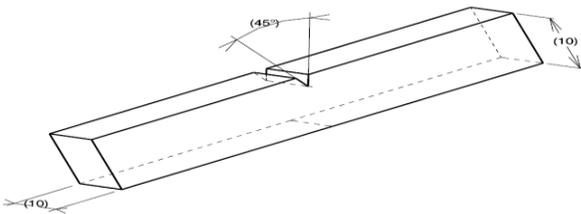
Dimensions of specimen for impact test (Charpy test).
